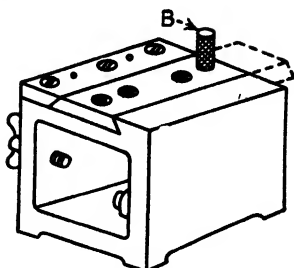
Slide carries bushings and pin *B* is used in indexing for different hole locations.
